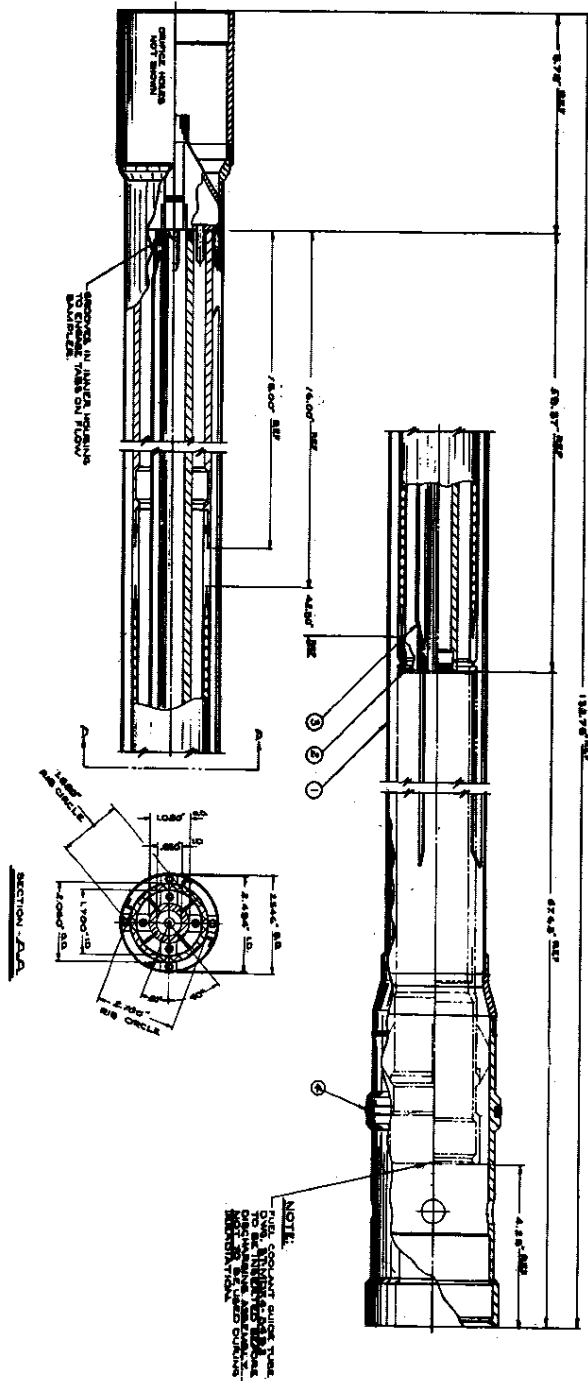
3 EMT FUEL ASSEMBLY (STAINLESS STEEL HOUSING)
